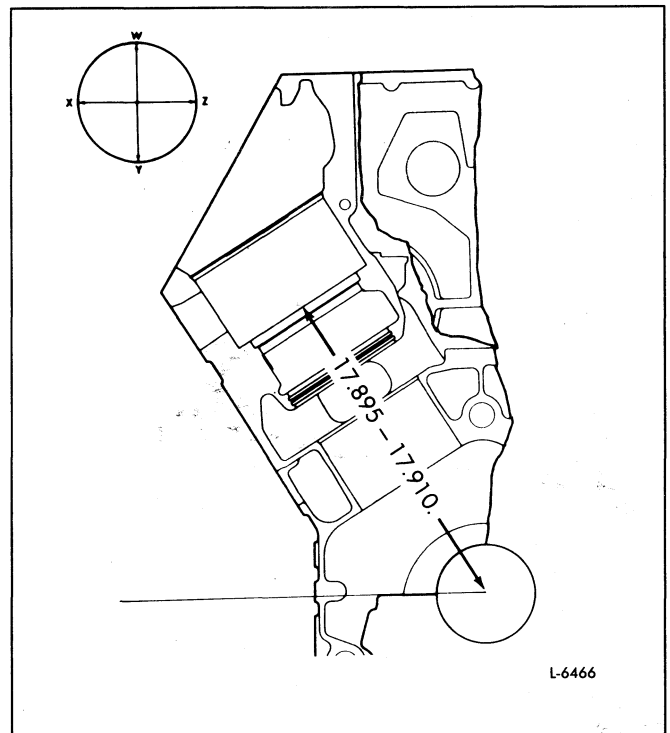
Crankshaft Center-to-Liner Seat Dimension
